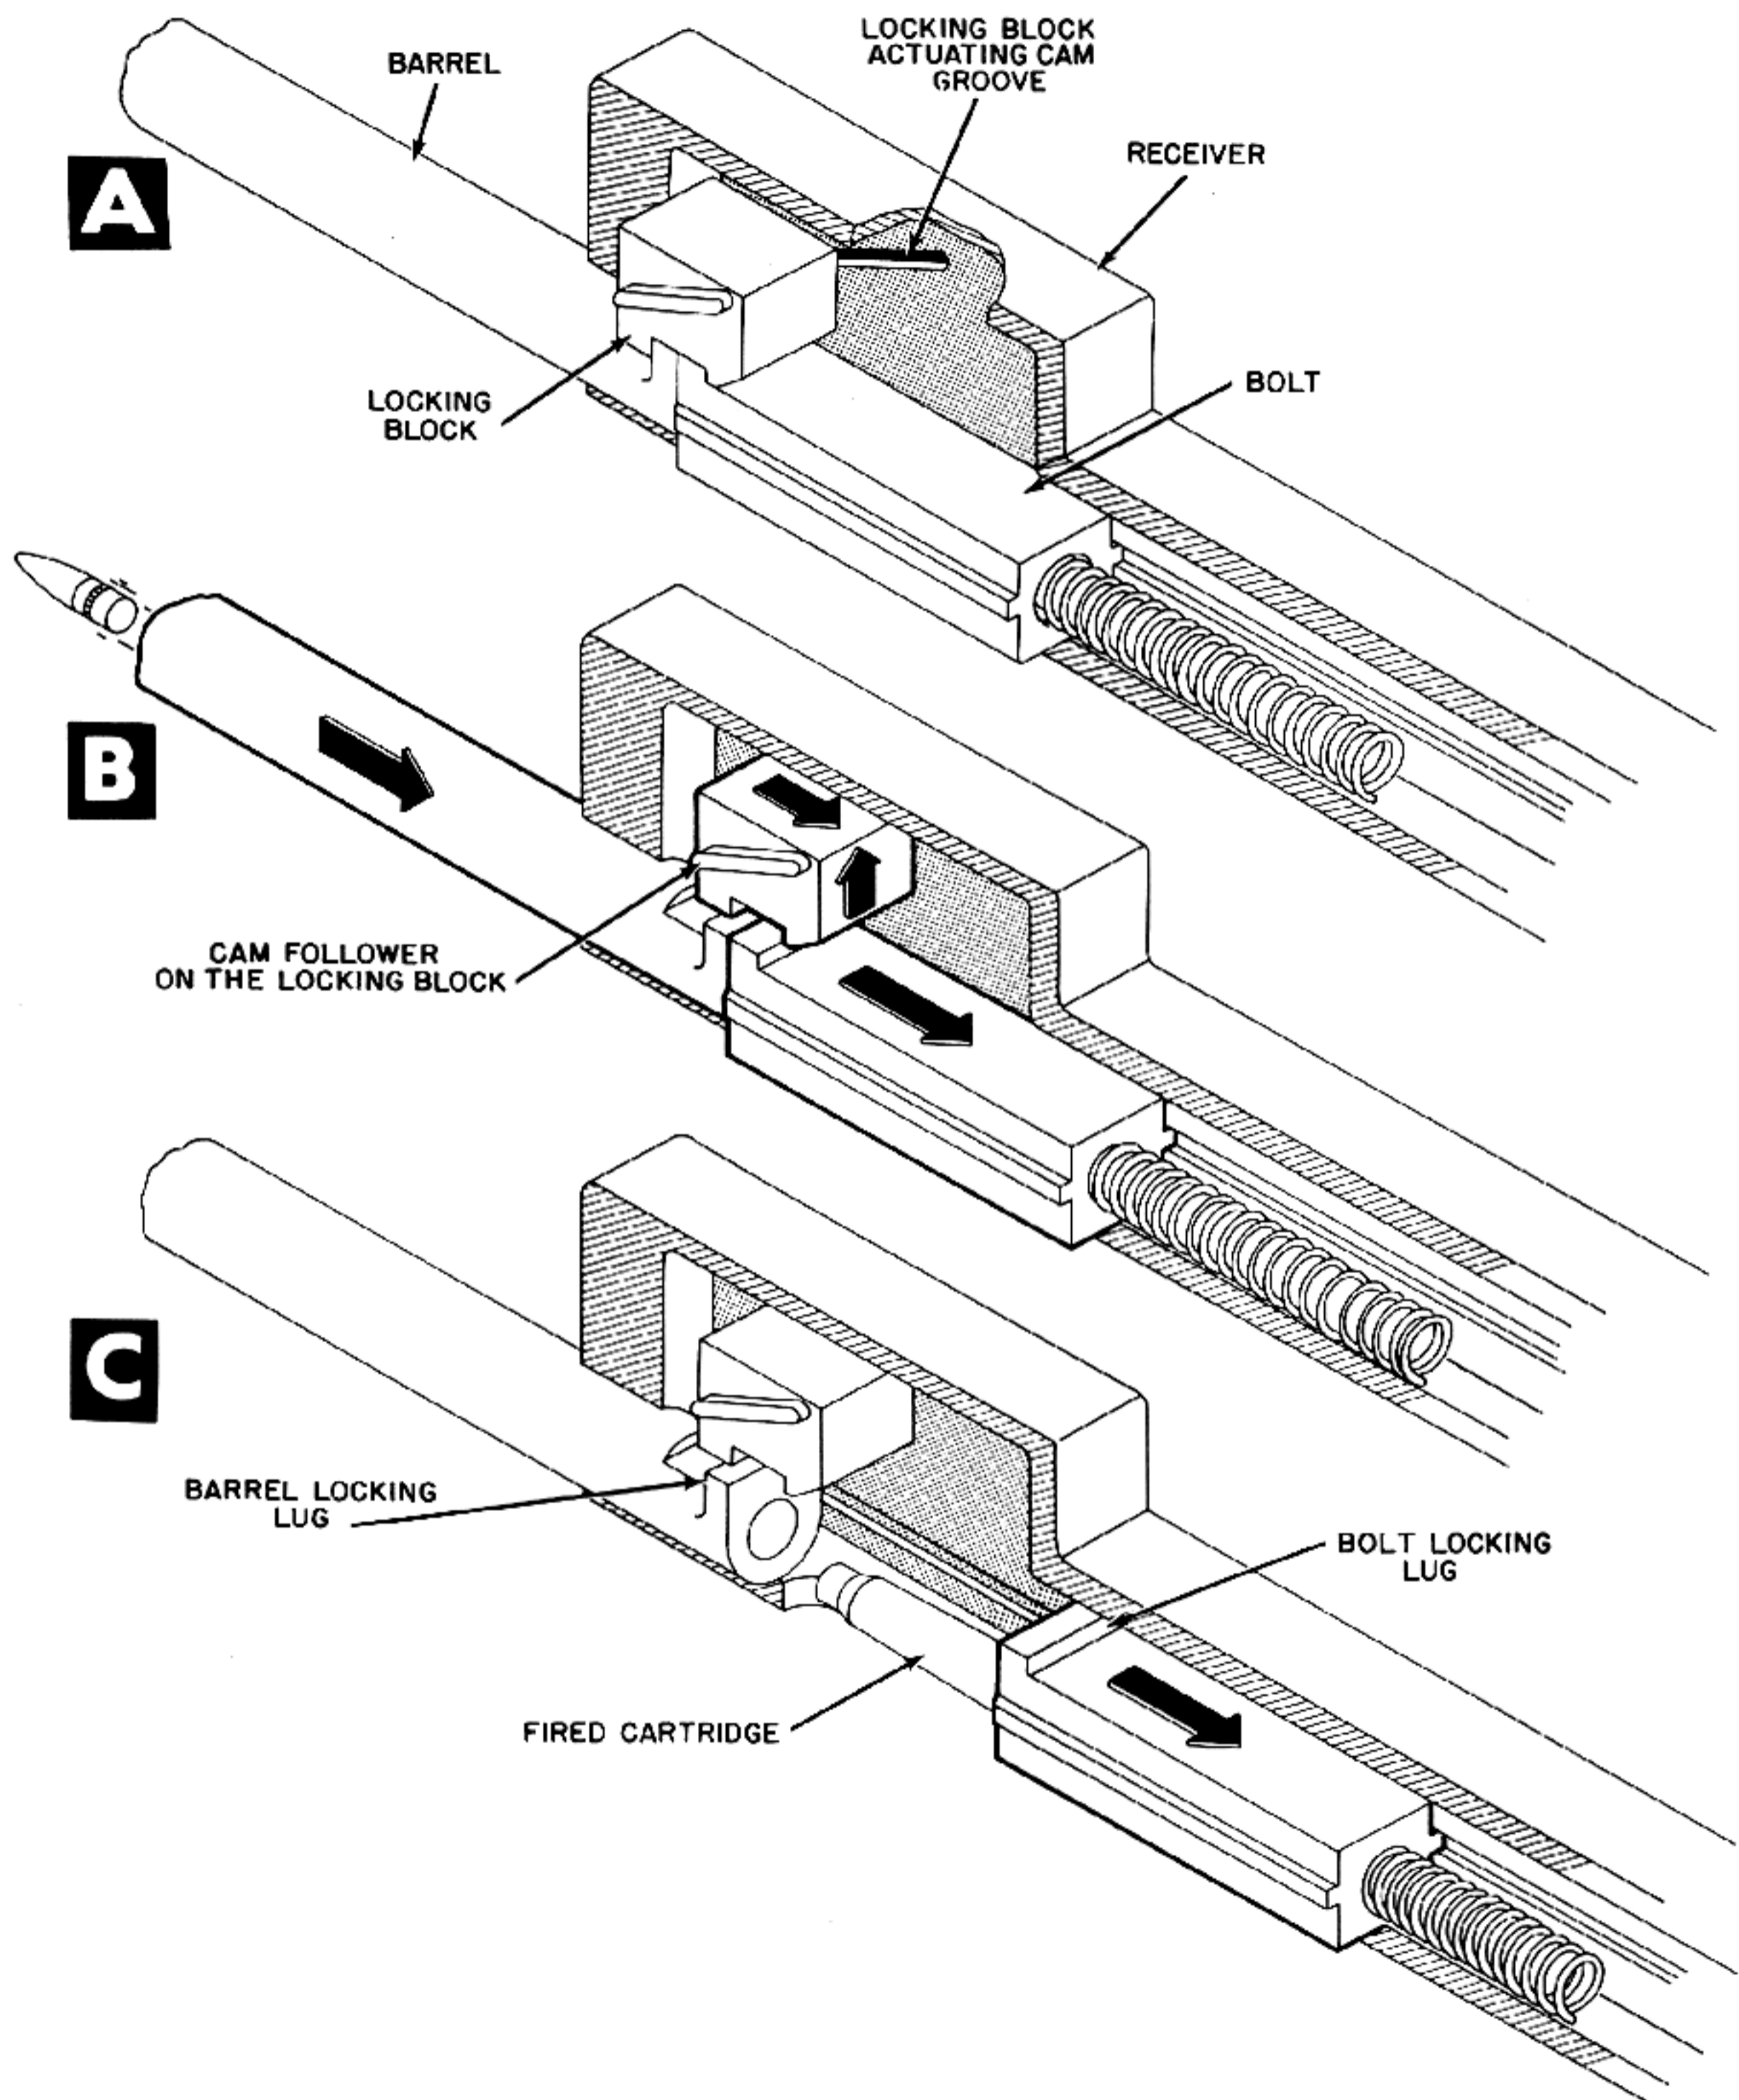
Locking Block Is Cammed Free by Grooves in Receiver as Gun Recoils.
